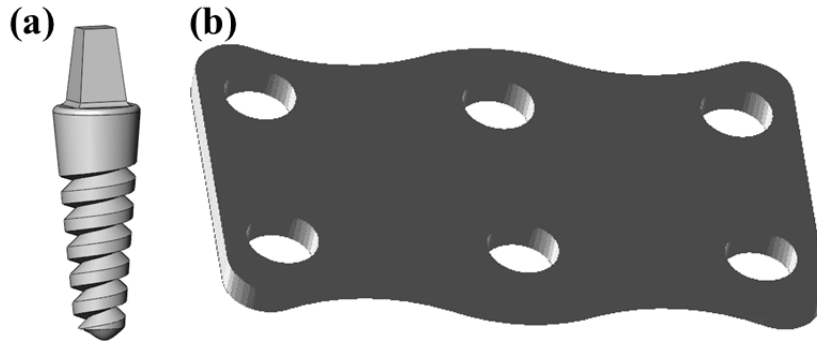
Isometric view of 3D CAD implant models (a) dental root, (b) spinal plate
